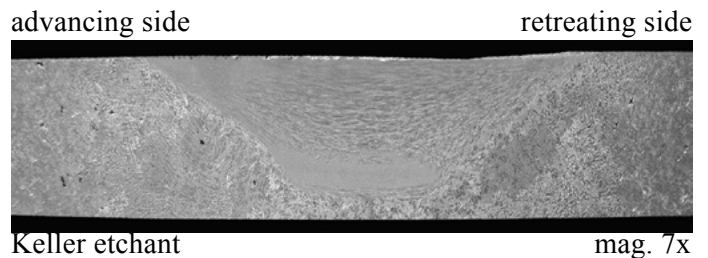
Macrostructure of the FSW weld made of casting aluminium alloy EN AC-43200. Welding parameters:  $V_n = 500$  rev./min,  $V_z = 200$  mm/min
